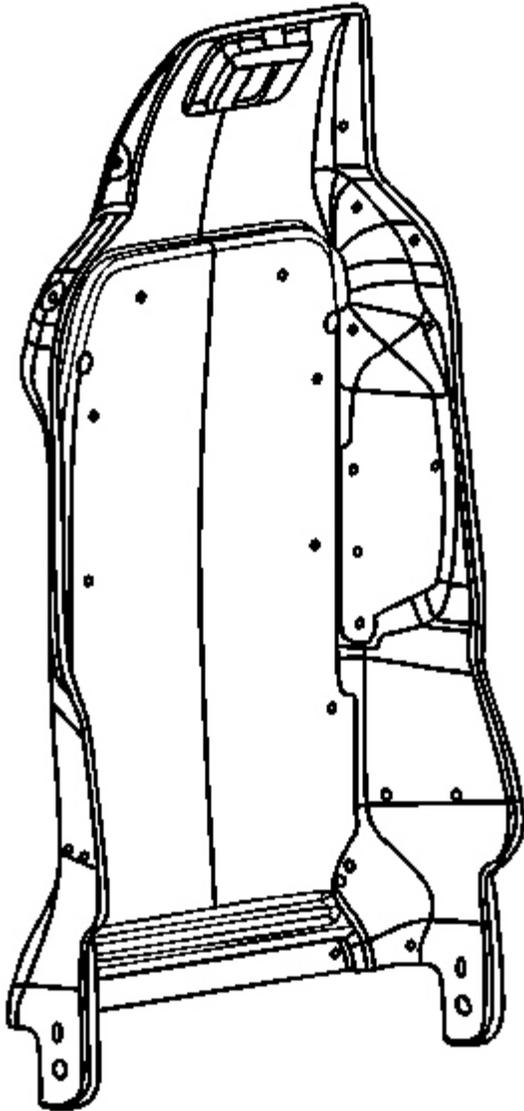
View Of Seat Back Frame & Lower Seat Assembly
